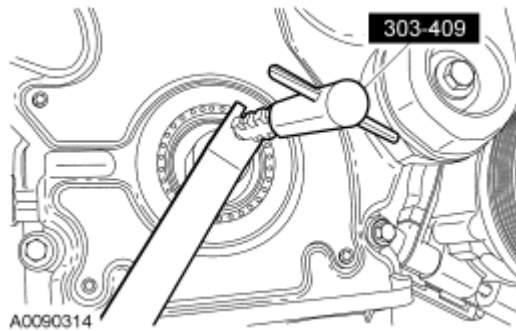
Removing Crankshaft Front Seal Using Special Tool (303-409)
